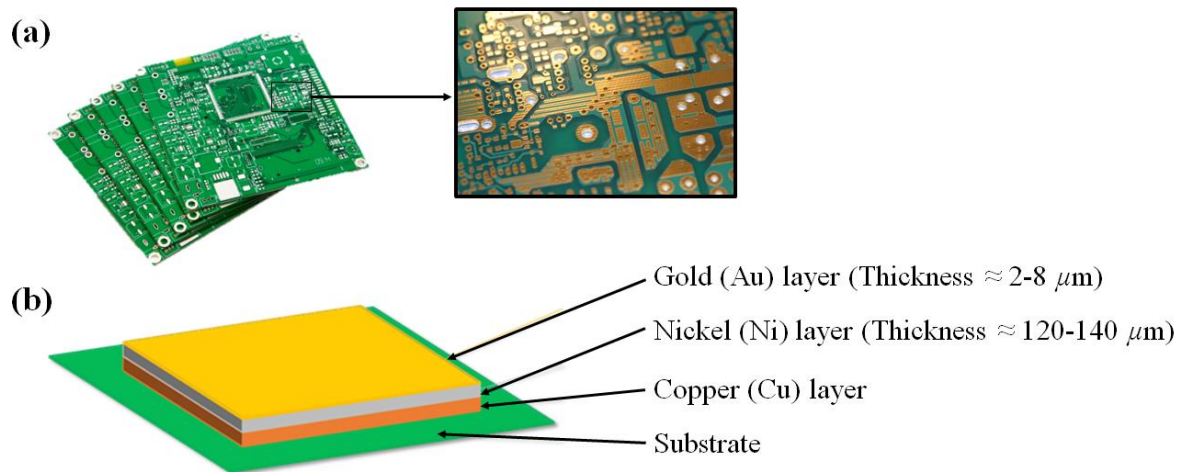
(a) Printed circuit boards (PCBs), and (b) Schema of layer configurations of the ENIG board finish.
